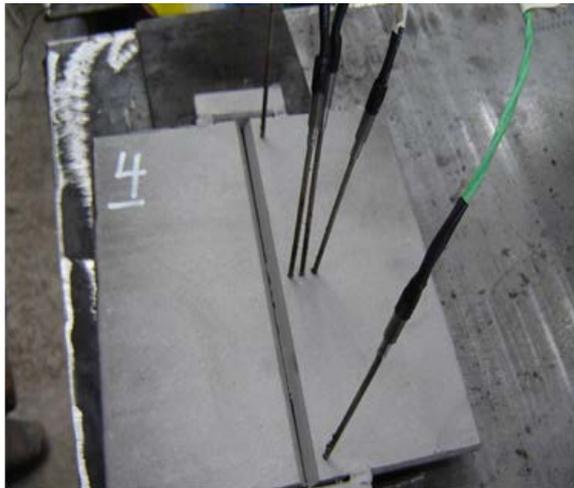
Thermocouples locations in the weld test plate practically in the two-dimension
